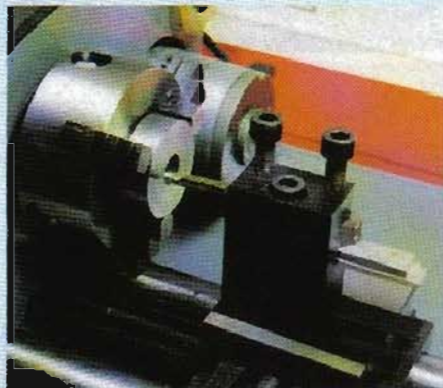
A typical machining operation using the new geared scroll three jaw chuck.
